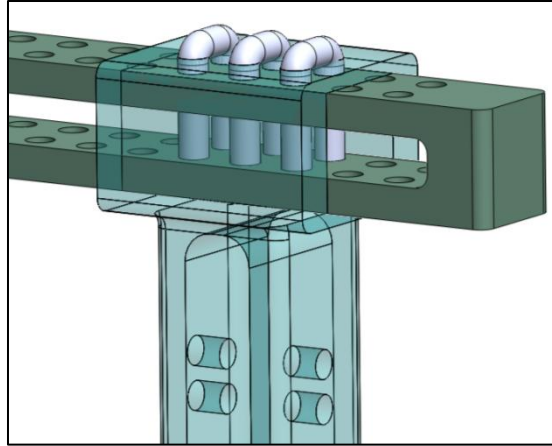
TUNNEL TRACK BRIDGE COMPONENT
